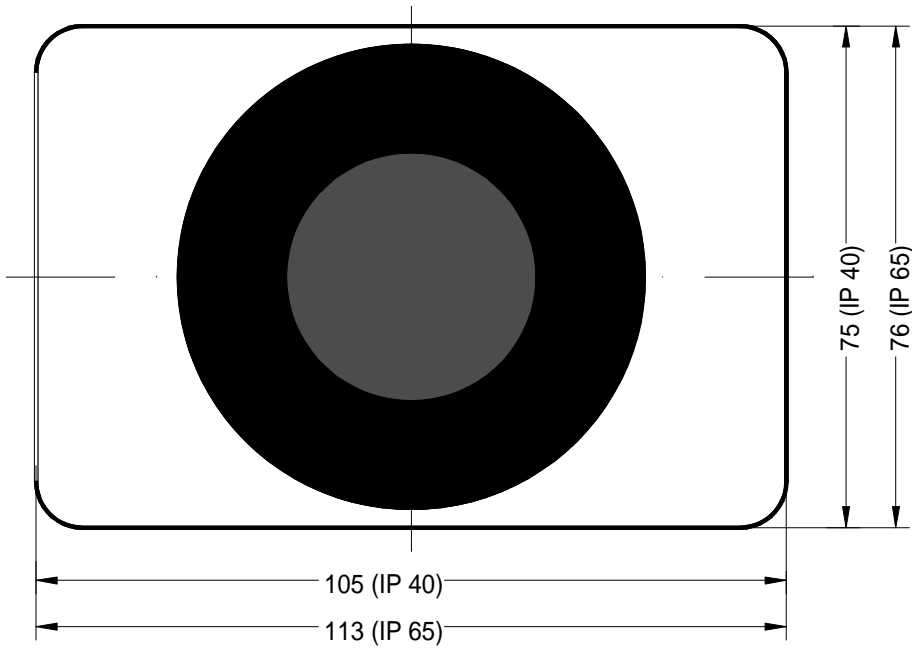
ATMION™ Wide Range Manometer Standard Version (front view on flange)
